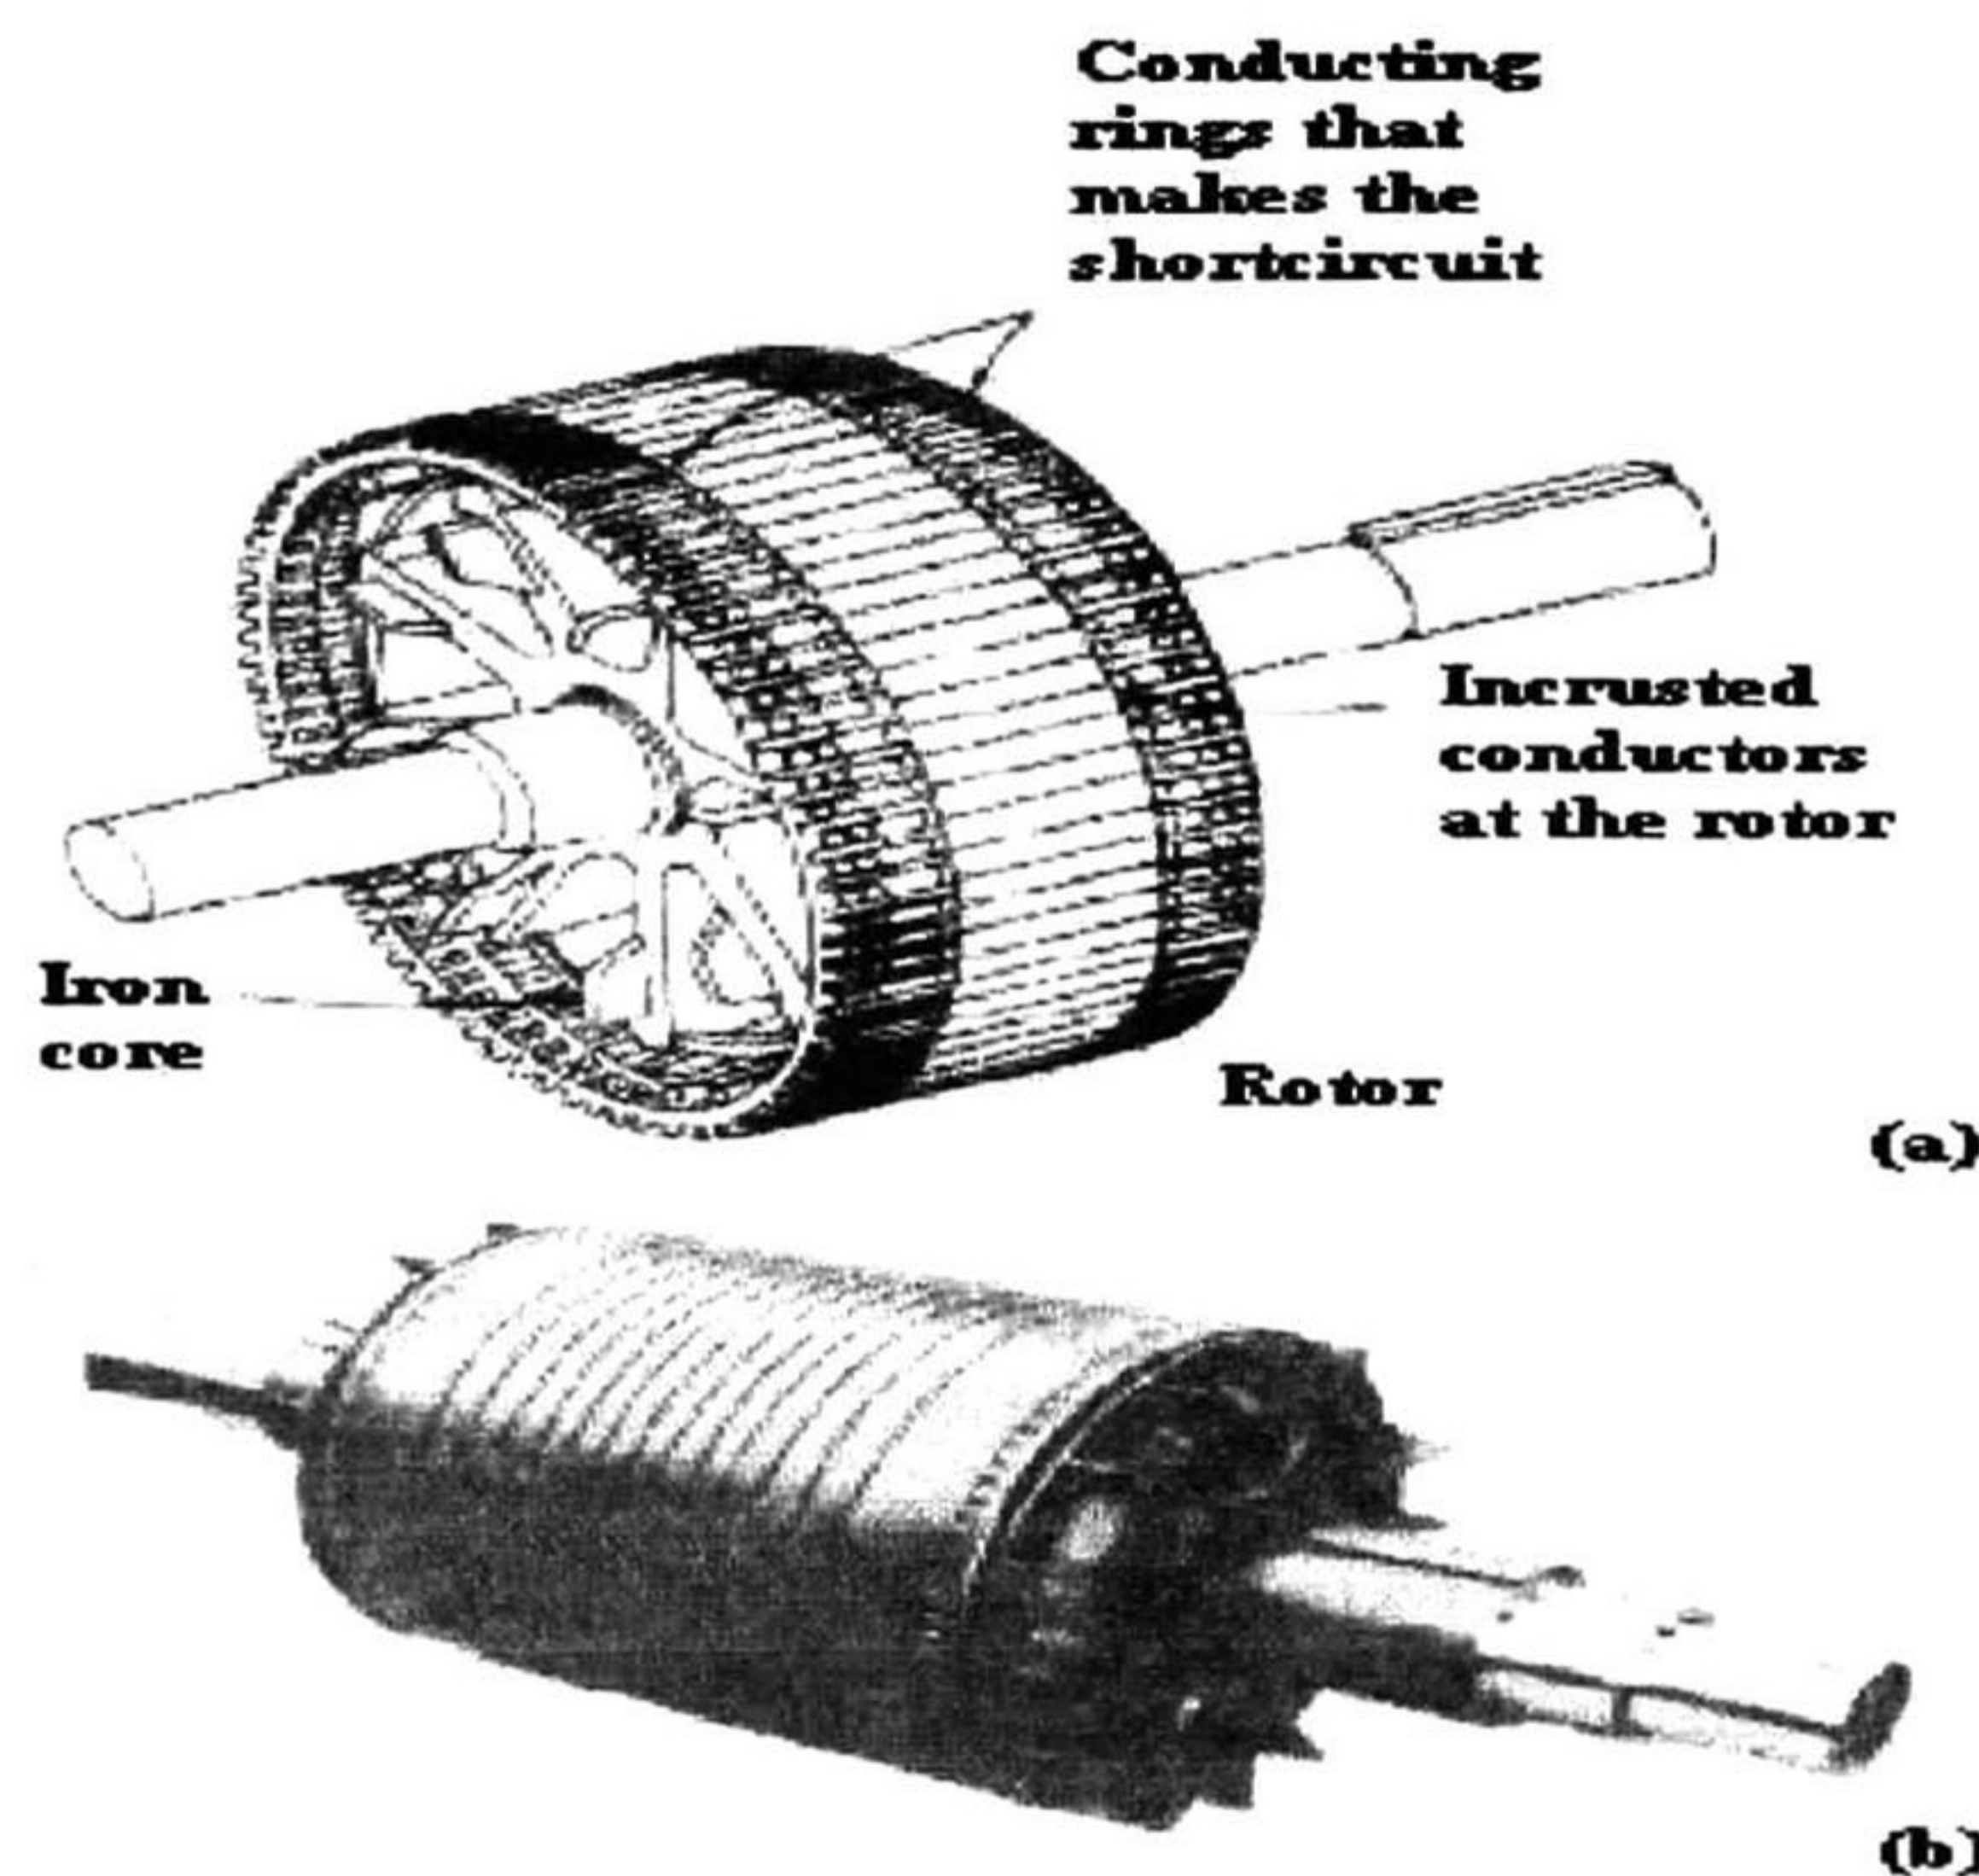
(a) Squirrel cage rotor. (b) Typical squirrel cage rotor.
